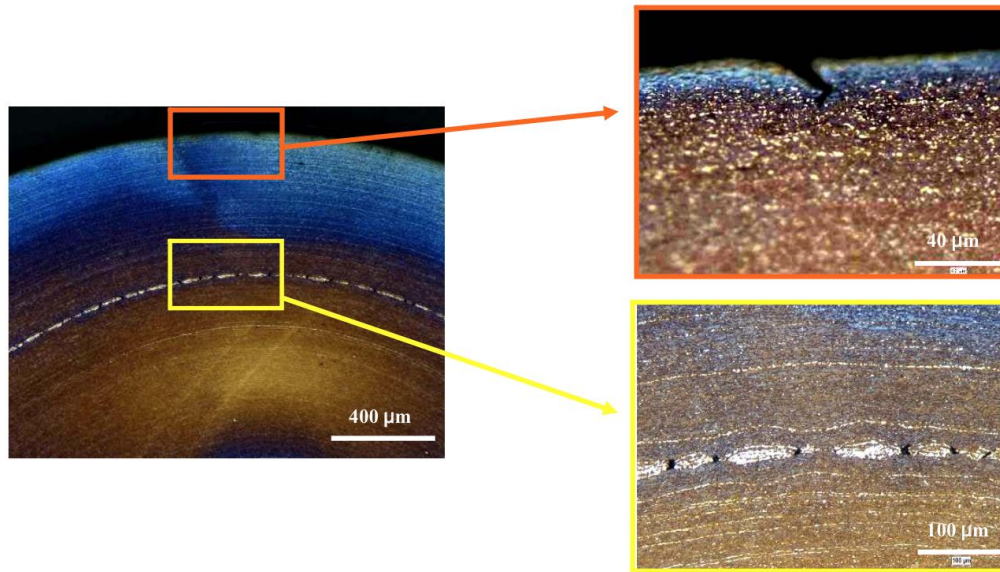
Cross-section of TRIP-aided steel after air bending test ^[2]. Example of surface crack and voids formed at the thick macro-segregation bands are highlighted.
